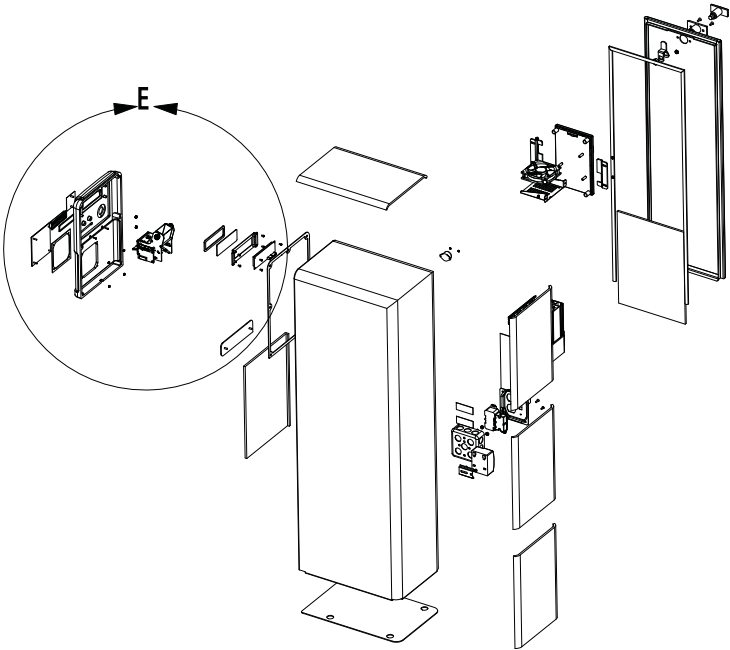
Barcode Exit Verifier (120VAC) Drawing, Detail E
